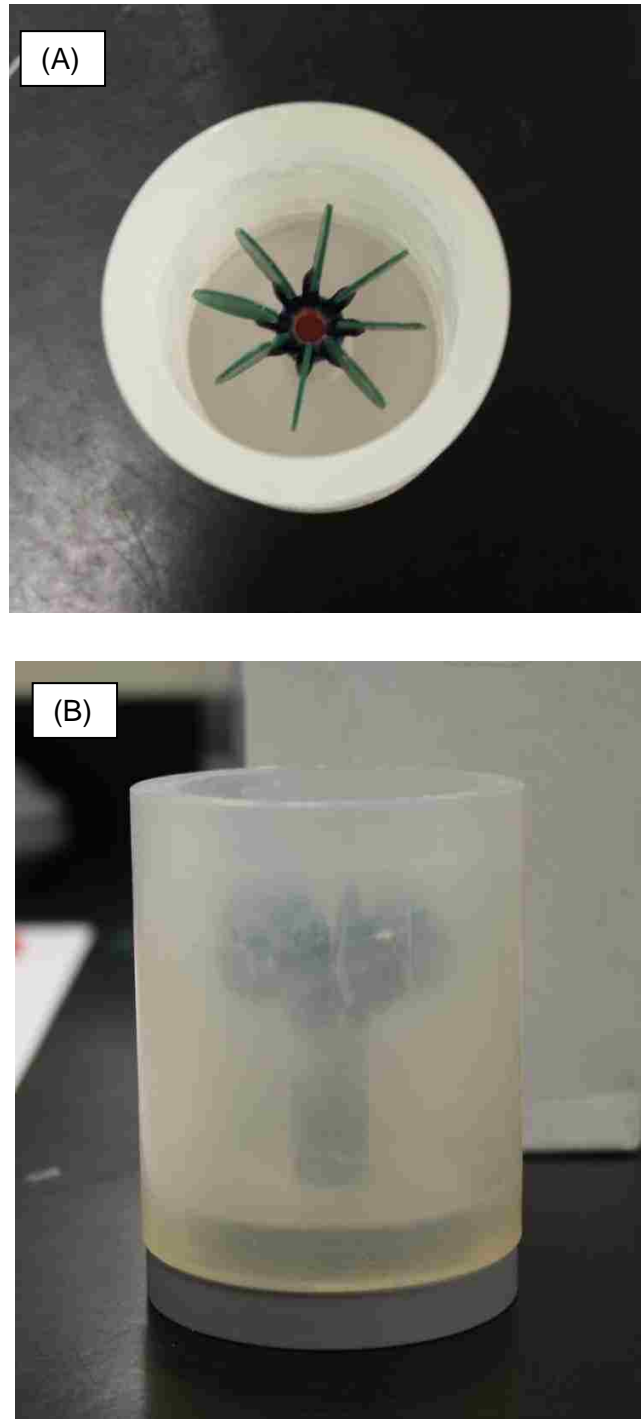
Macrophotographs of a wax pattern mold ready for investing;
